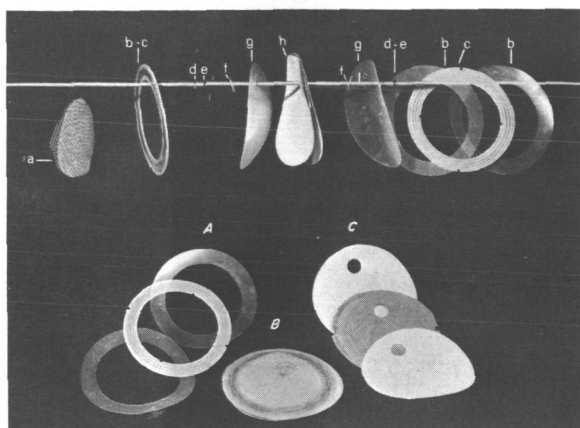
Reverse-osmosis subassembly. *a*. Double layer of polyethylene screen. *b-c*. Spacer ring and two polyethylene gaskets at left-hand end of supporting rod and at *B* below. Expanded components shown at right-hand end of supporting rod. *d*. The female grommet. *e*. Quad ring. *d-e*. At the right, the quad ring is on the cylindrical section of the male grommet component. *f*. Polyethylene gaskets, which are cemented around the holes in membranes *g*. *h*. Nylon paper layers and layer of woven and centered wire screen (expanded view in *C*). *A*. The complete subassembly.
